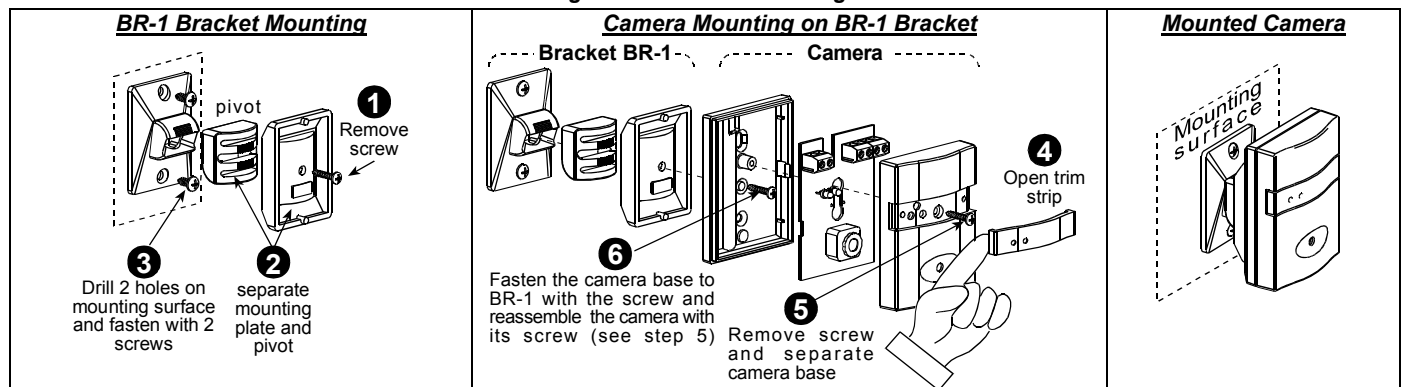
Surface Mounting with BR-1 Swivel Bracket
